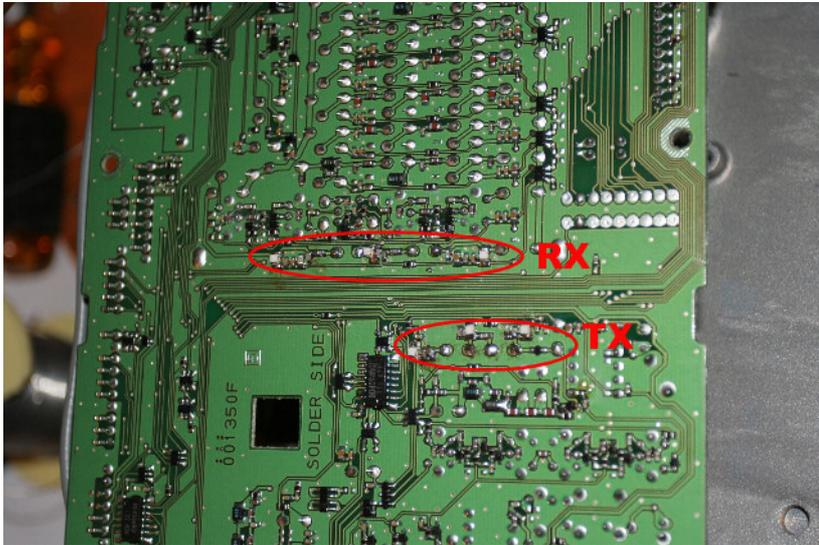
PCB bottom view of the modified 54-76 MHz RX and TX filters
